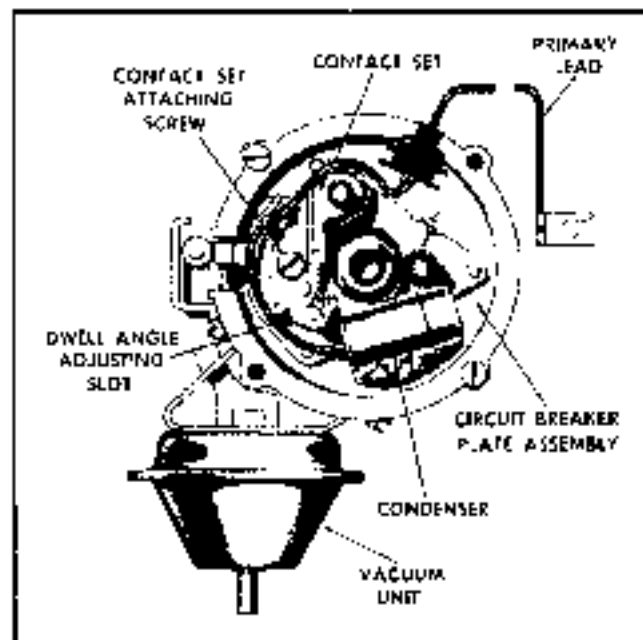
E-21 Top View of Distributor (Cap and Rotor Removed)
